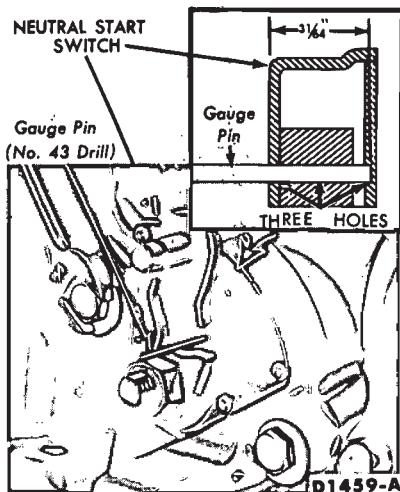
Neutral Start Switch Adjustments—Console Shift—Mustang
